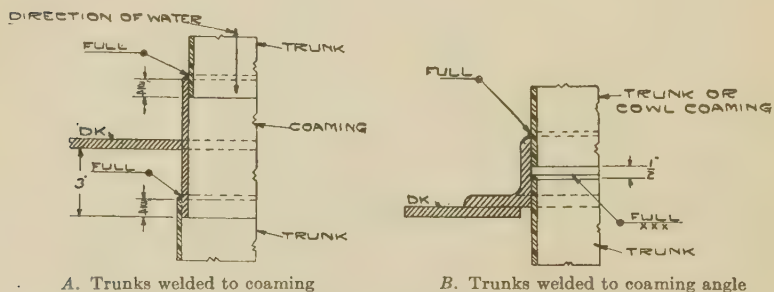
Welded joints of ducts and trunks to coamings.
